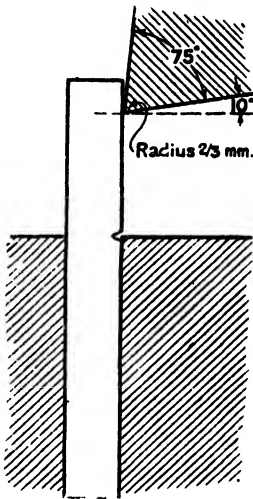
STANDARD METHOD OF CLAMPING AND STRIKING IZOD TEST PIECE
